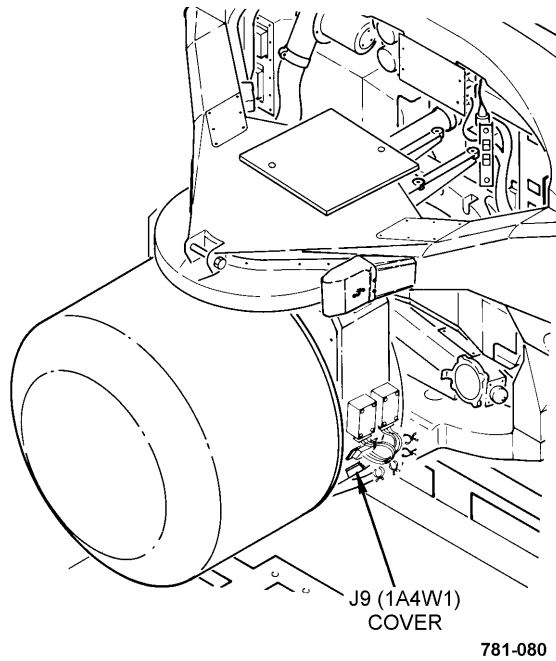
Azimuth Gimbal Assembly Connector Locations
